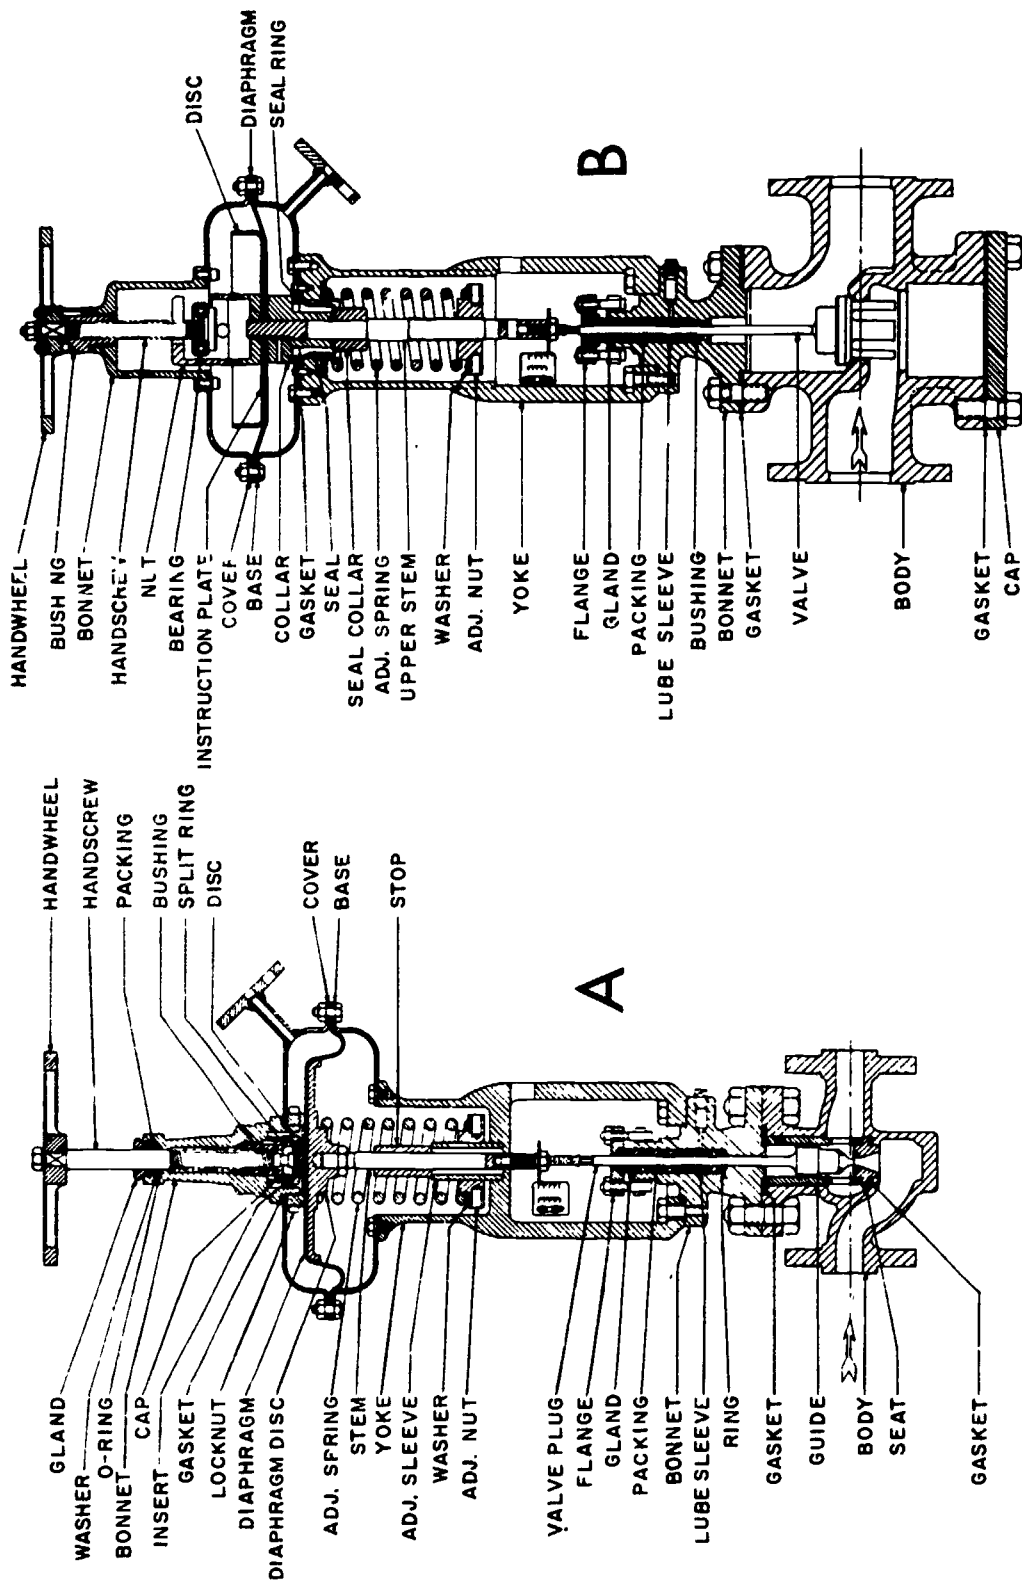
Gland seal steam regulators. A. Gland seal steam make-up with actuator. B. Gland seal steam unloading valve with actuator. 96.50
